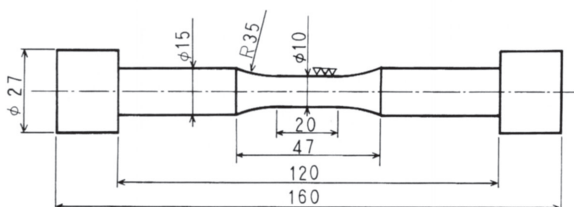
Shape and dimensions of low cycle fatigue test specimen.
